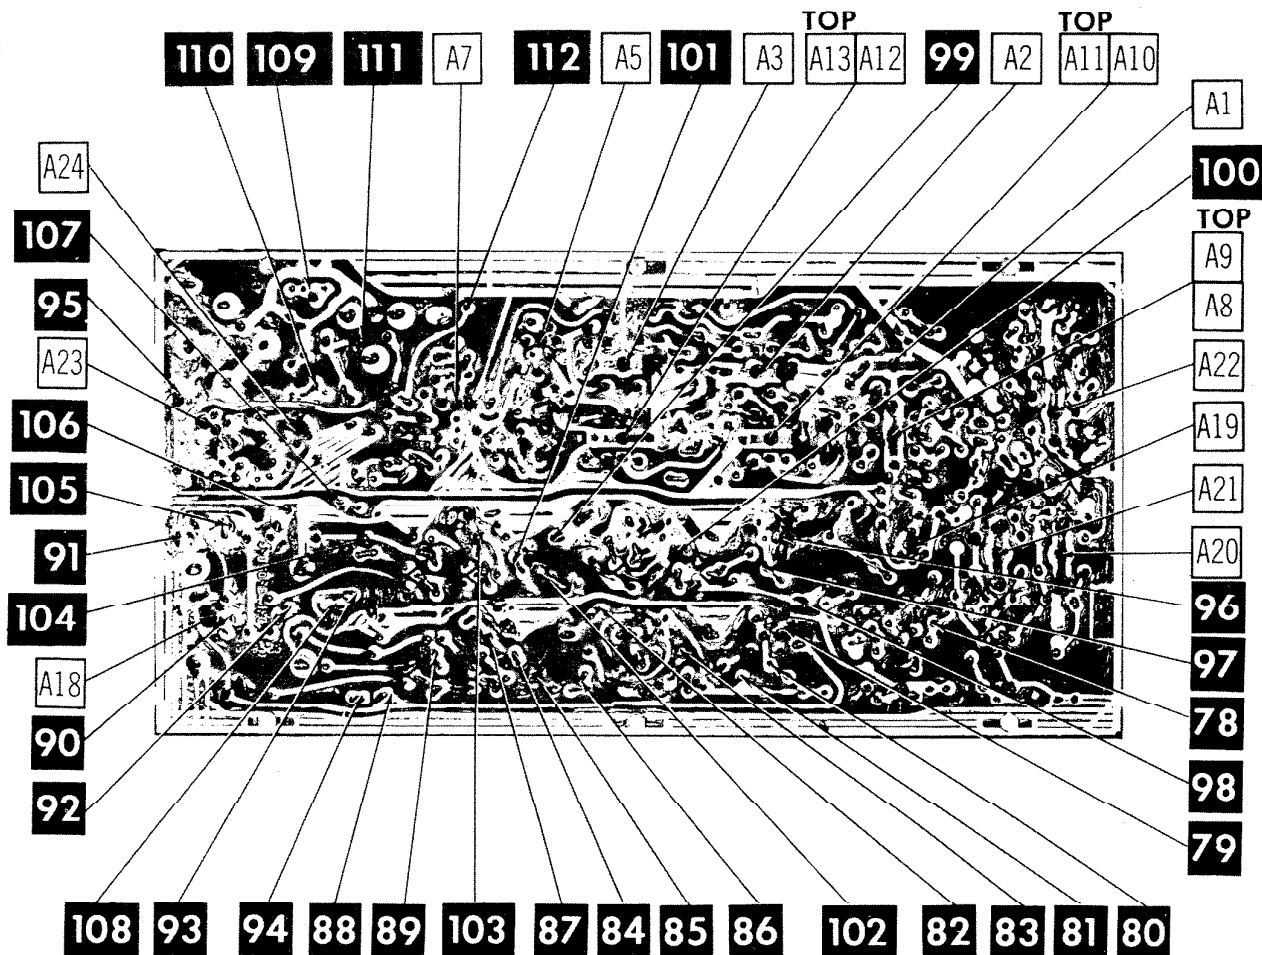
Bottom view of printed board—CircuiTrace and alignment points.
